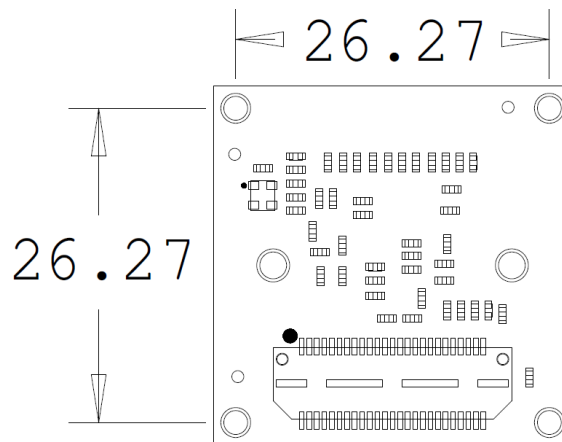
e-CAM10_CU0130_MOD bottom drawing (mirrored)
